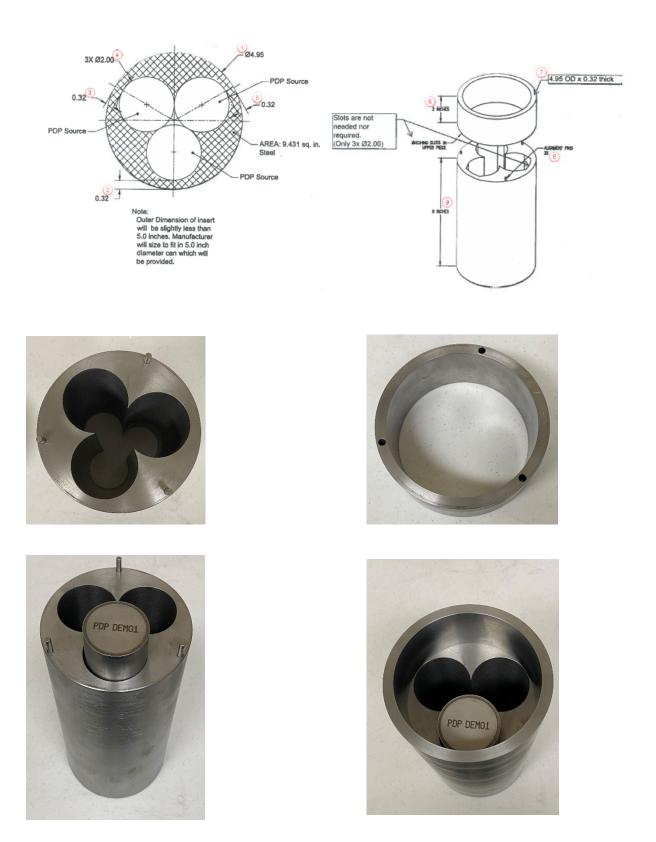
Cut Away View and Actual Source Insert Fixture Assembly (Insert Fixture with Cover Ring and Demonstration Source)
